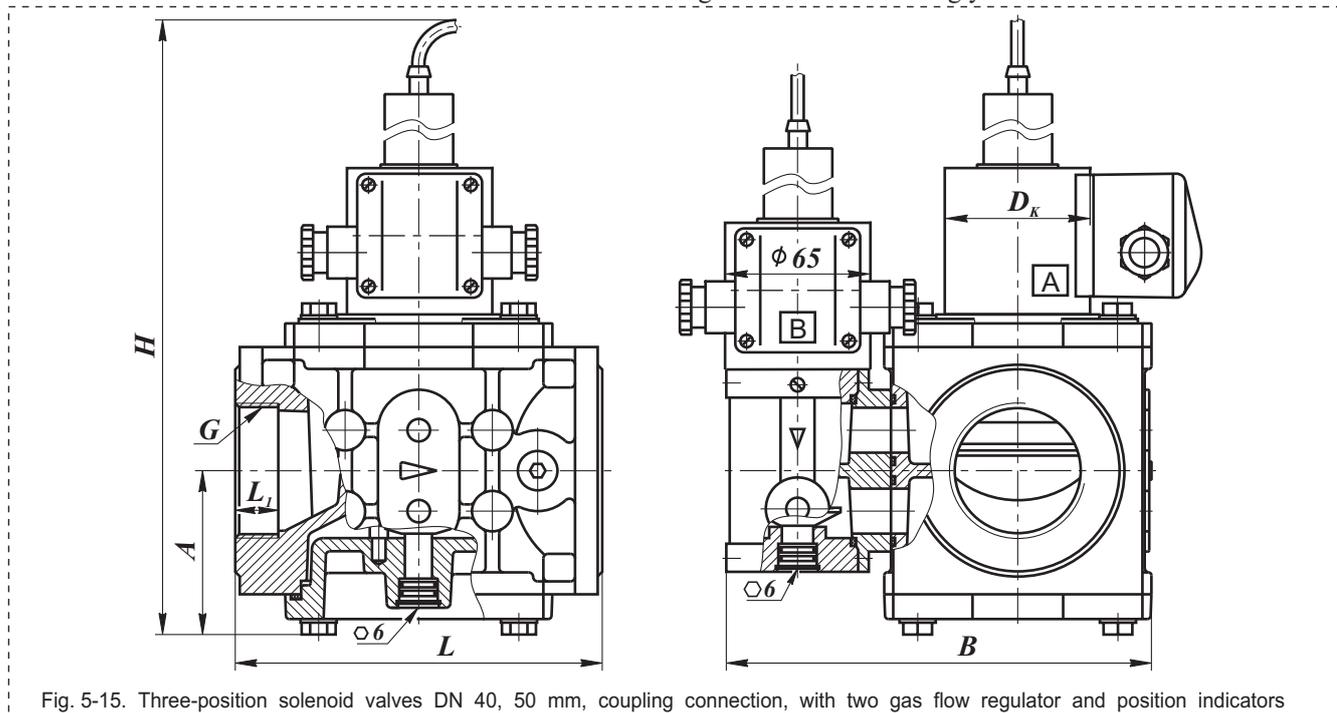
Three-position solenoid valves DN 40, 50 mm, coupling connection, with two gas flow regulator and position indicators
